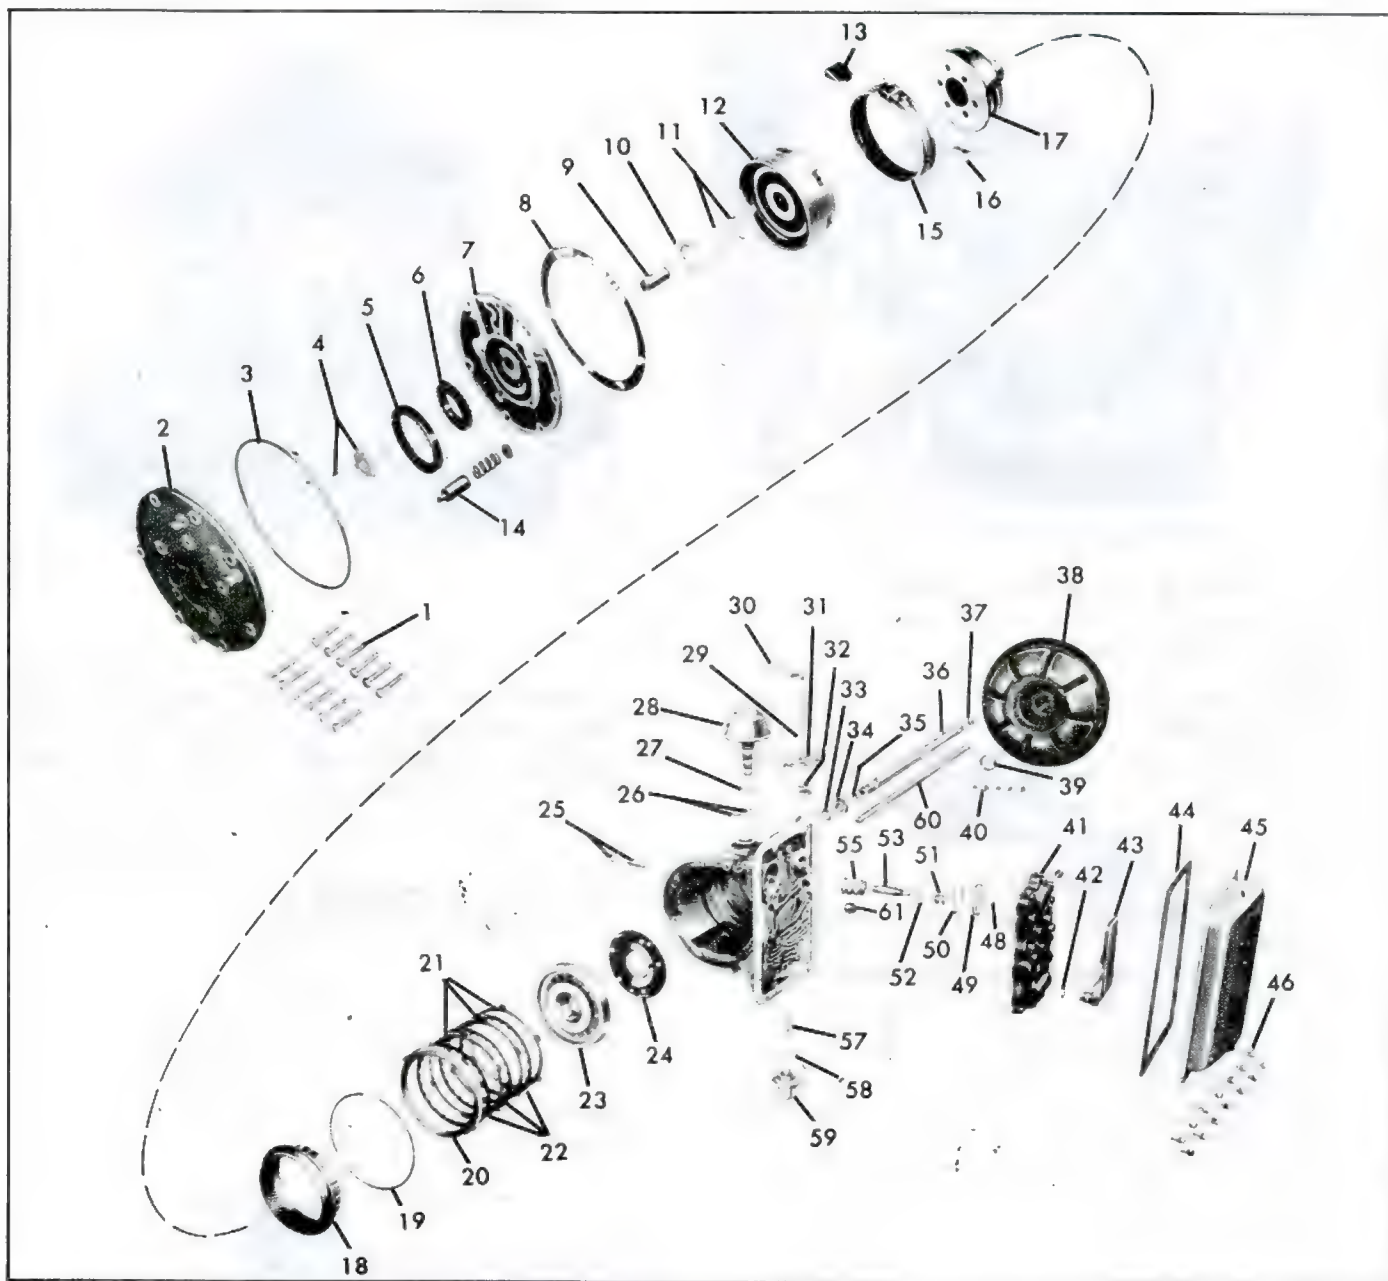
E-29—"Corvair" Powerglide—Exploded View
